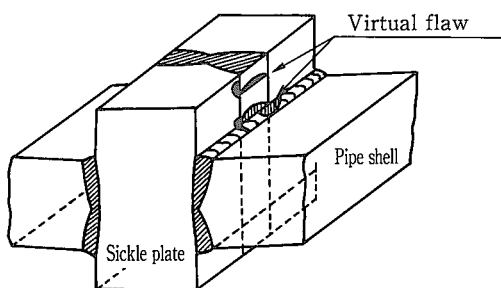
Investigated weldment and virtual flaw⁸⁾
